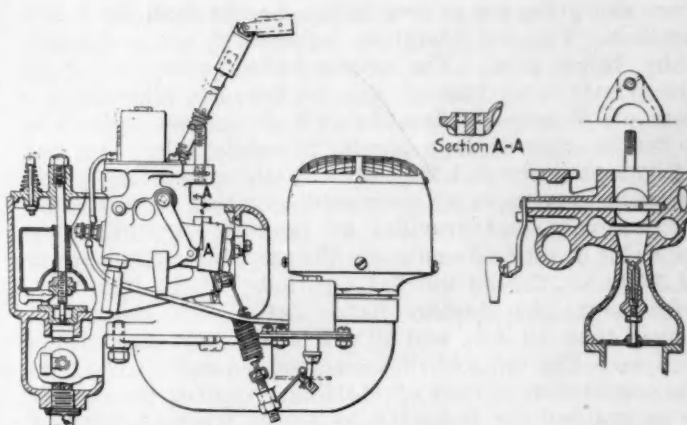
ELEVATION PARTLY IN SECTION AND A CROSS-SECTION OF THE CARBURETER
